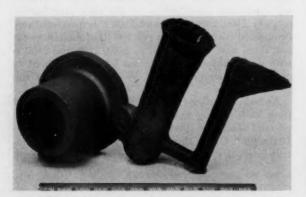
Hydraulic pressure test cylinder casting showing gate and riser.
